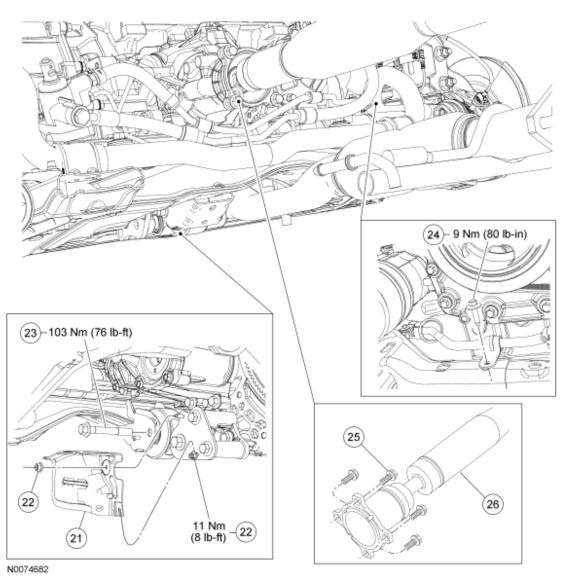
Locating Exhaust Flexible Pipe, Y-Pipe & Nuts Courtesy of FORD MOTOR CO.
